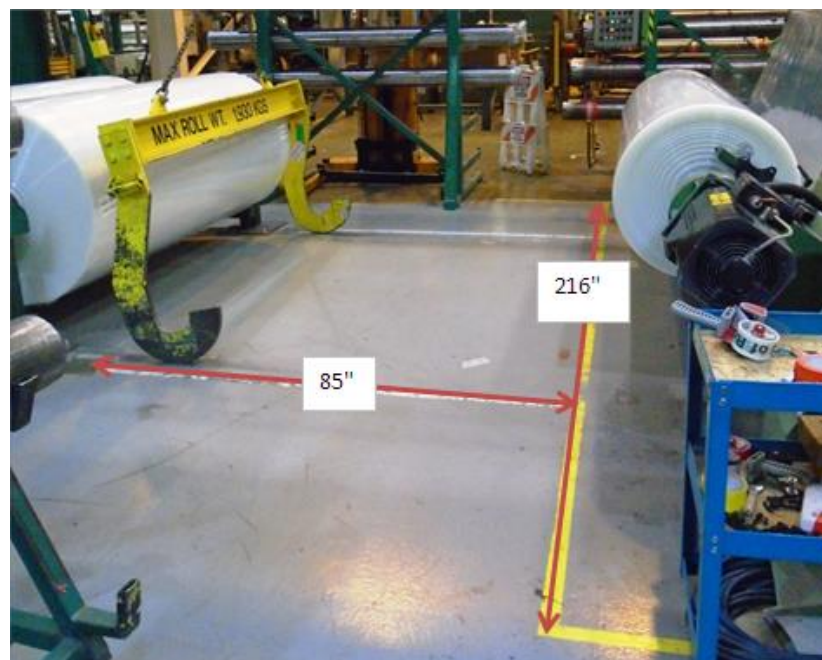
Dimensions of the work area in front of the slitting machine [6].
